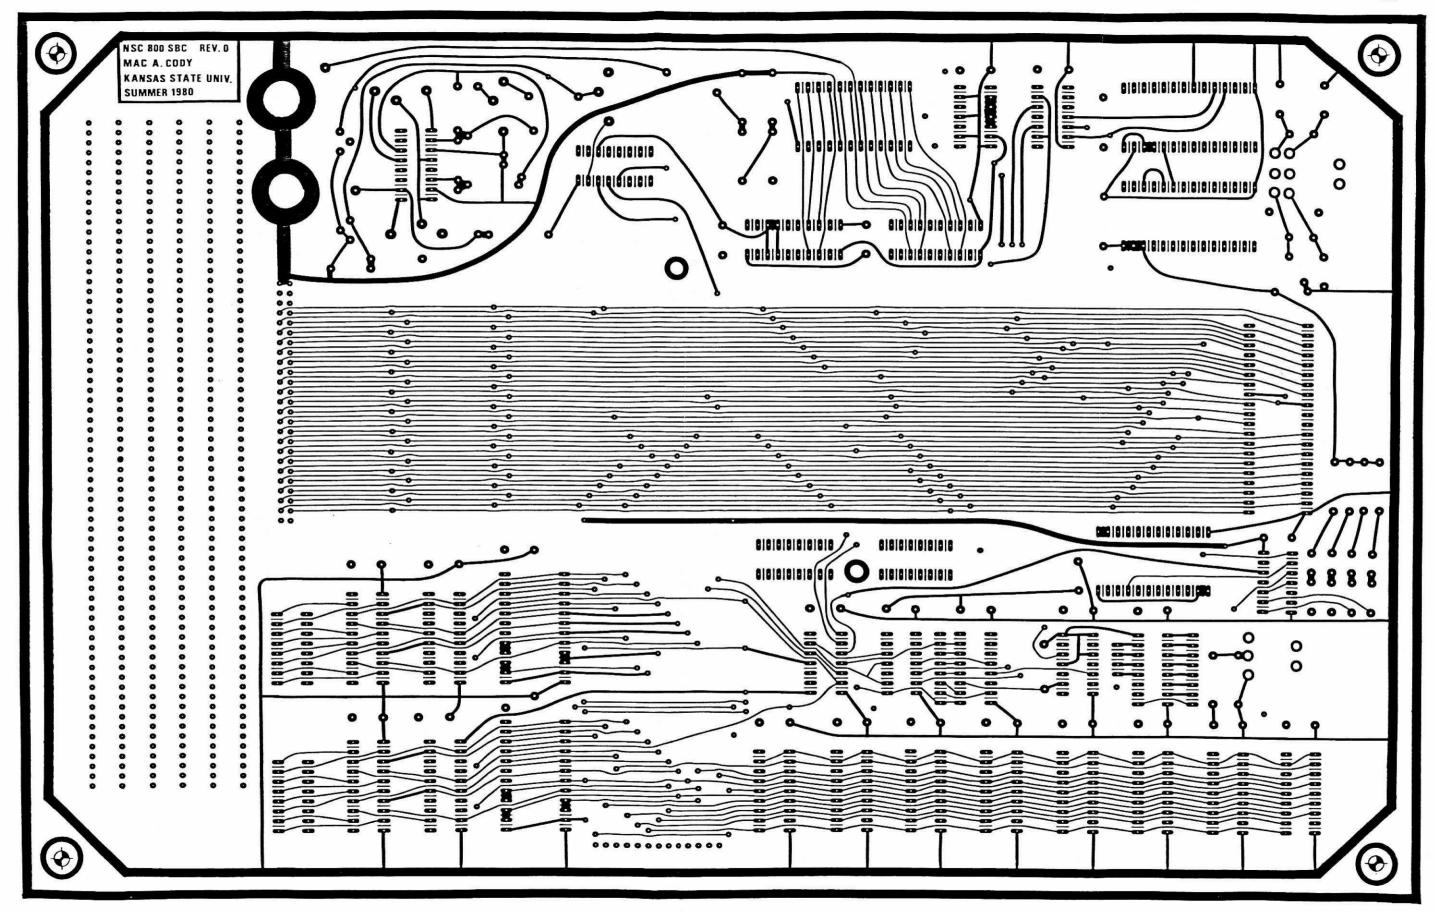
NSC800 SBC PRINTED CIRCUIT BOARD (CIRCUIT SIDE)
